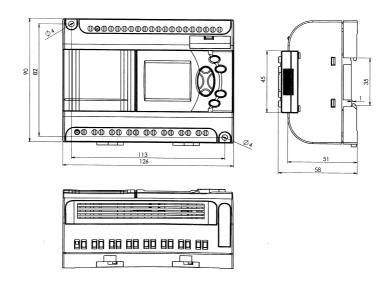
AF-20 FAB Series installation size (Unit: mm)
